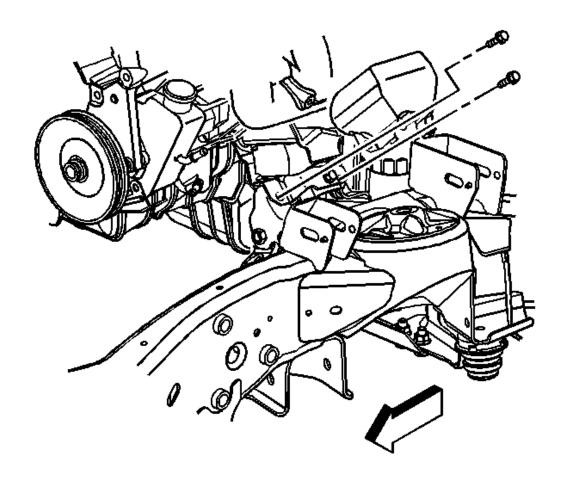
View Of Engine Mount Heat Shield Courtesy of GENERAL MOTORS CORP.
